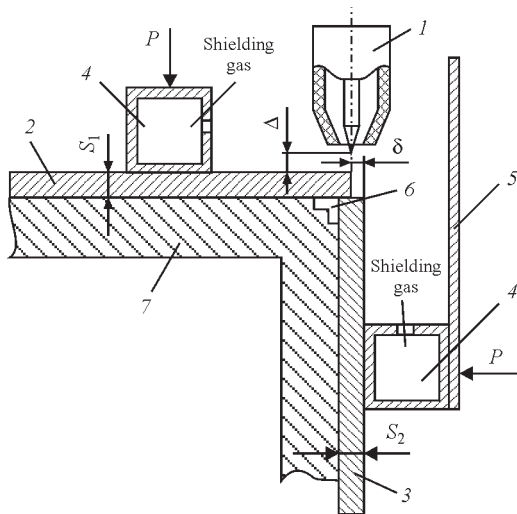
Scheme of assembly of structure elements before welding of fillet joint: 1 — welding torch; 2, 3 — semi-products being welded; 4 — gas channel, for protection of outer side of the workpiece; 5 — protective screen; 6 — gas channel, for protect of back side of the workpiece weld; 7 — force part of rigging
